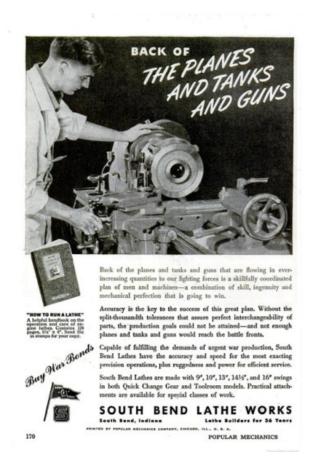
This image highlights the importance society may place on manufacturing engineers and machinists.
